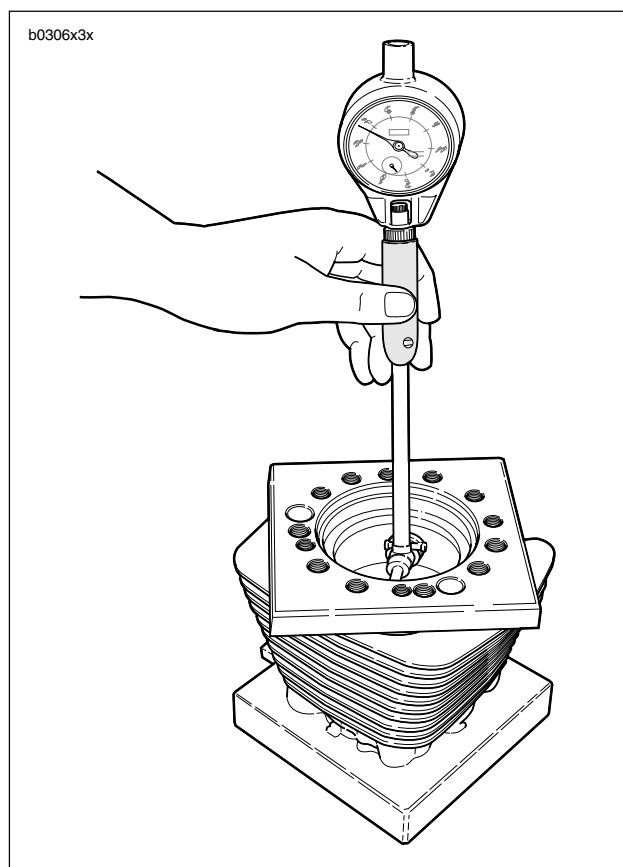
Measuring Cylinder Bore Using Torque Plates (Part No. HD-33446A)
